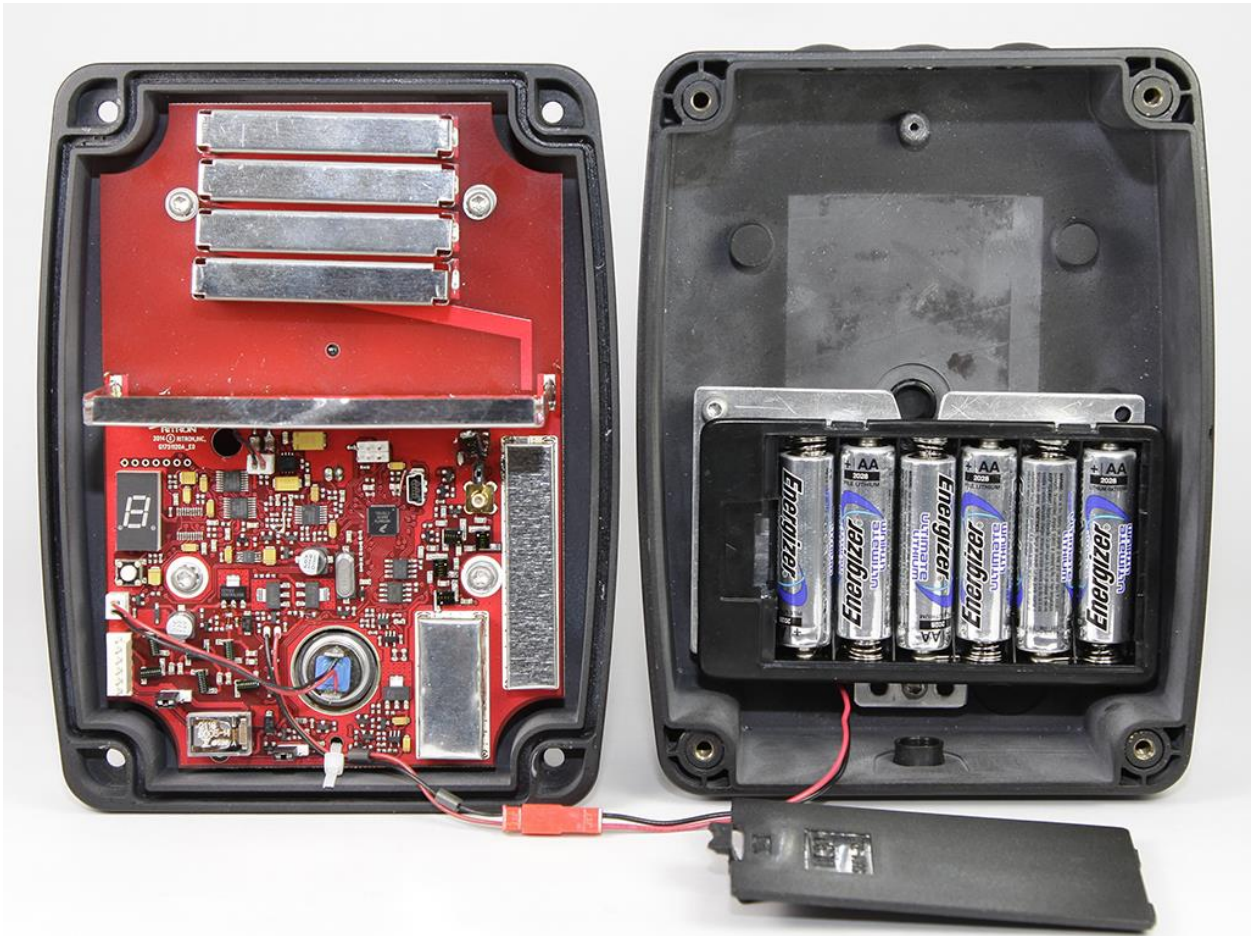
complete bottom side PCB assembly
